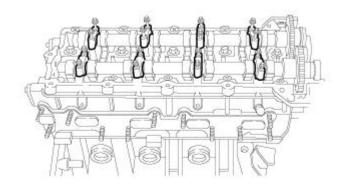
Front Camshaft Bearing Journal Courtesy of CHRYSLER LLC
